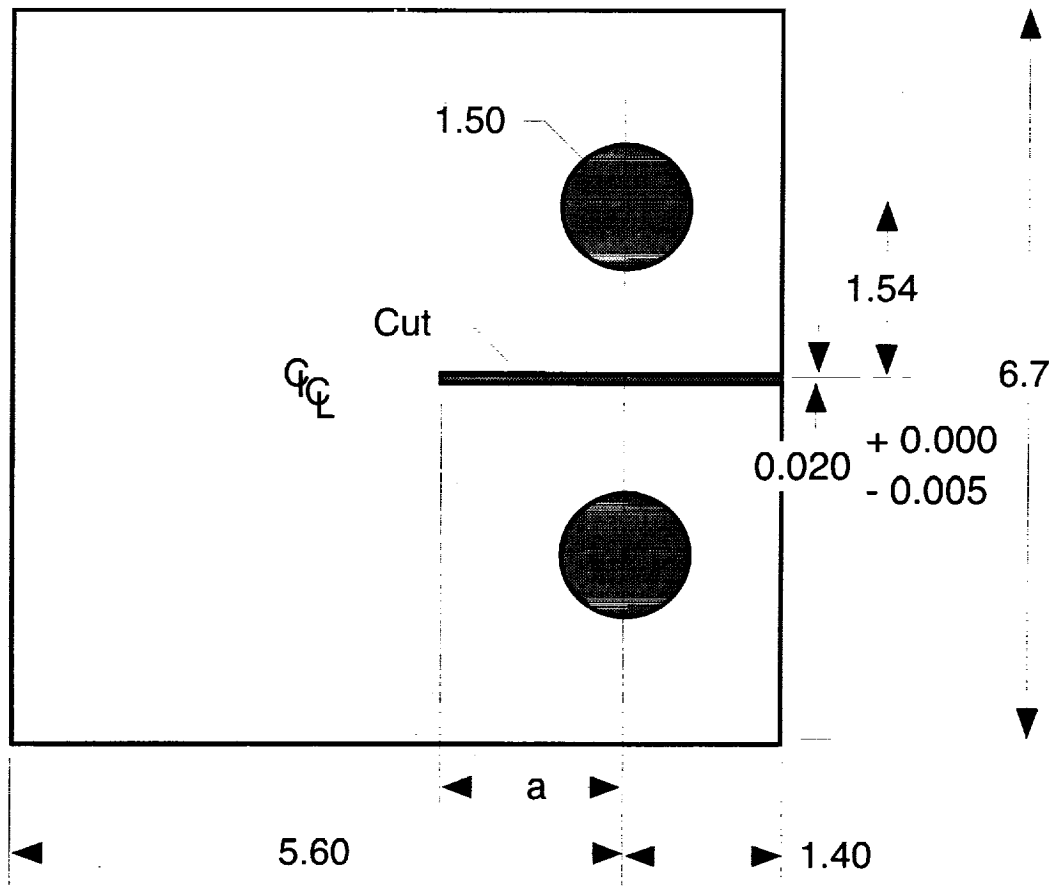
Drawing of 12.0-inch-wide center notch tension (CNT) specimens.
